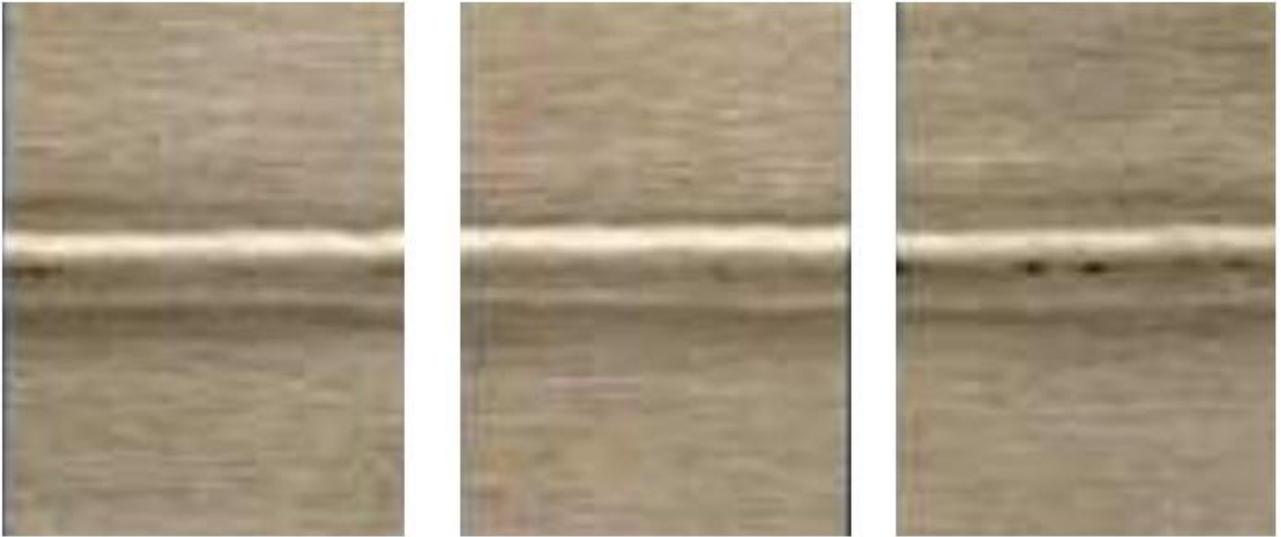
INCONEL C-276 welded with INCO-WELD 686CPT filler metal (pitting resistance of various base metal and weld metal combinations).
